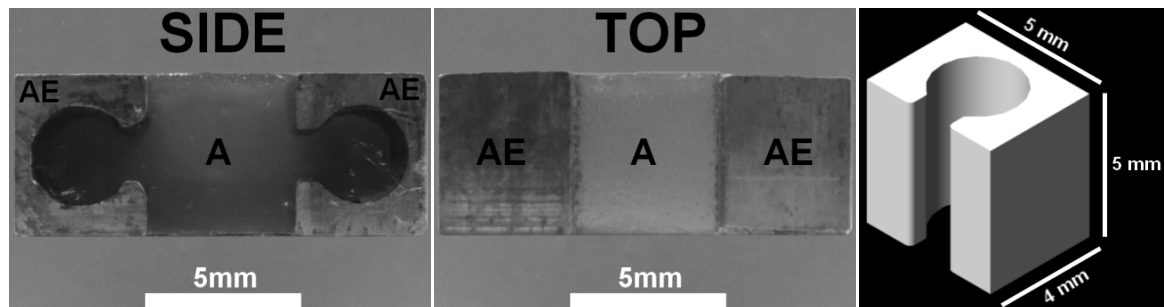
Side (left) and top (middle) view of agarose-aluminium end plate construct (Bar: 5 mm). Schematic drawing of the aluminium end plate (right).
